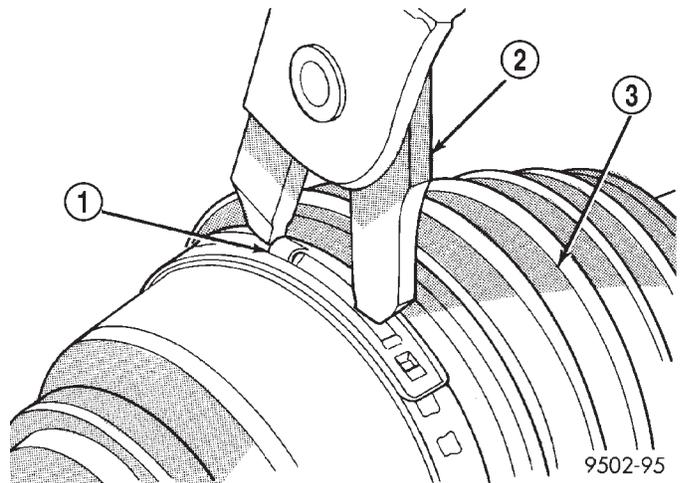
Clamping Tool Installed on Sealing Boot Clamp
